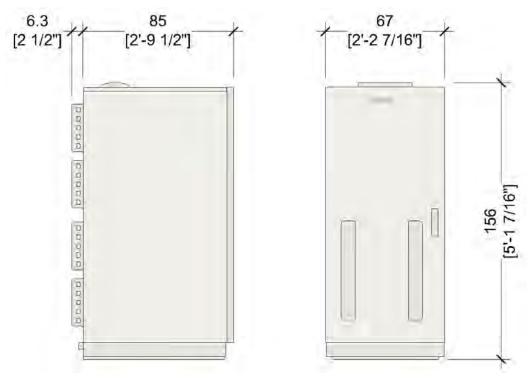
Console Cabinet Dimensions (Front and Side View)
